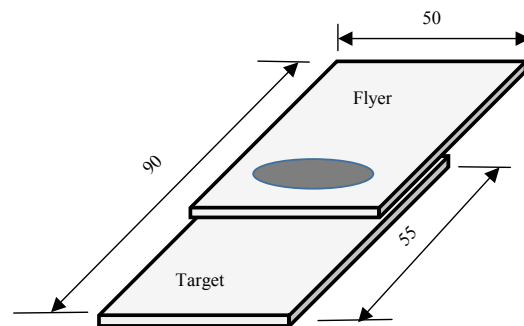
Schematic arrangement of test specimen of the EMPW(Unit: mm)
